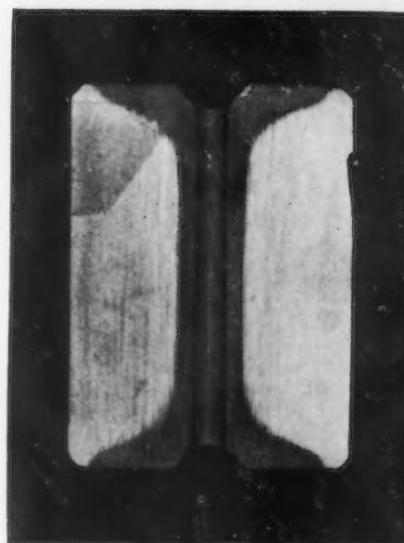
This solid screw header die failed by chipping although it showed an ideal hardening pattern after it had been sectioned and etched.
